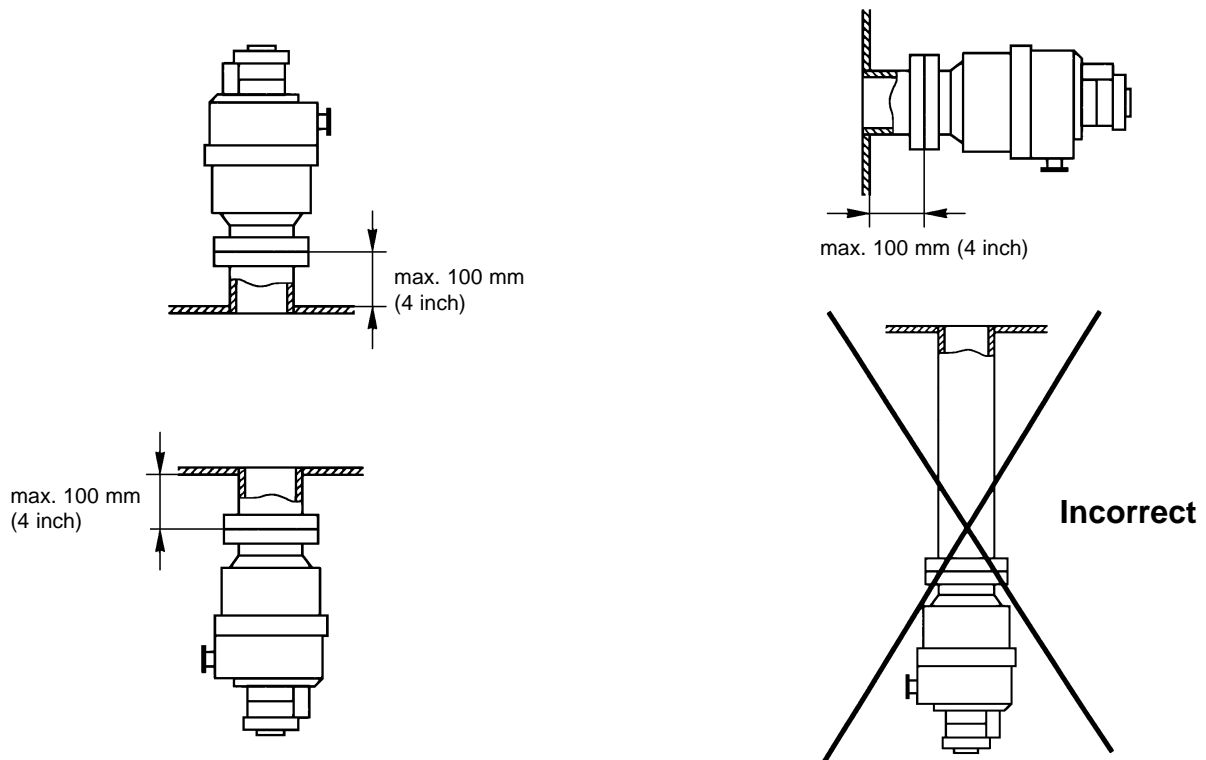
Permanent flanging of the TURBOVAC to the vacuum chamber
